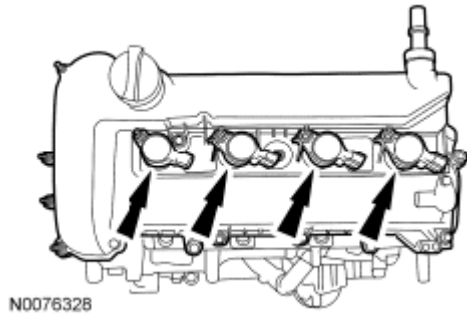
Locating Ignition Coil-On-Plug Bolts
